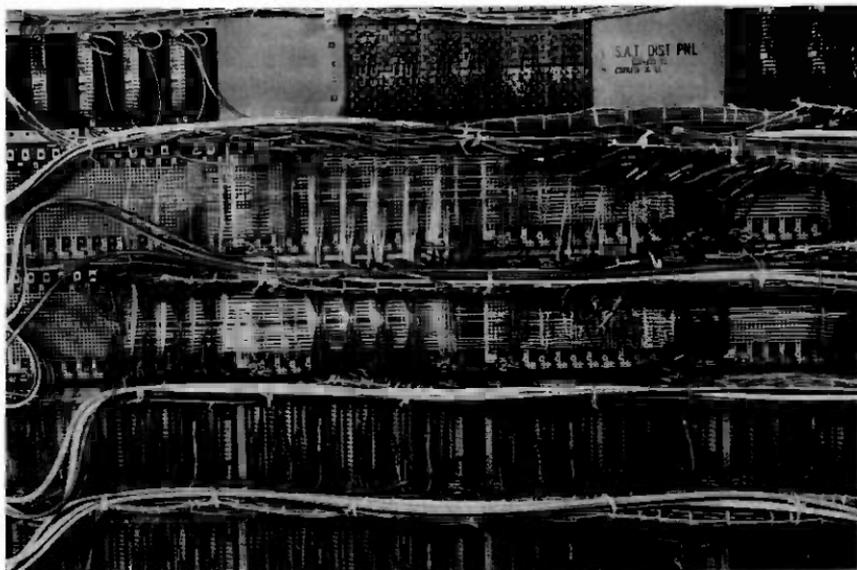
Backplane wiring showing both local wiring and interpanel cabling.
